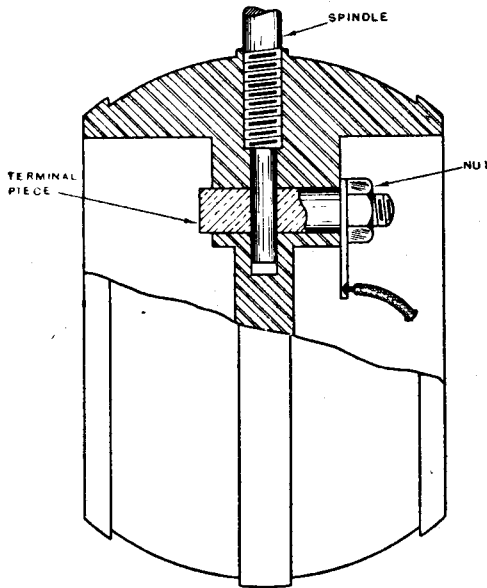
Here the terminal piece is clamped up on to the spindle.
